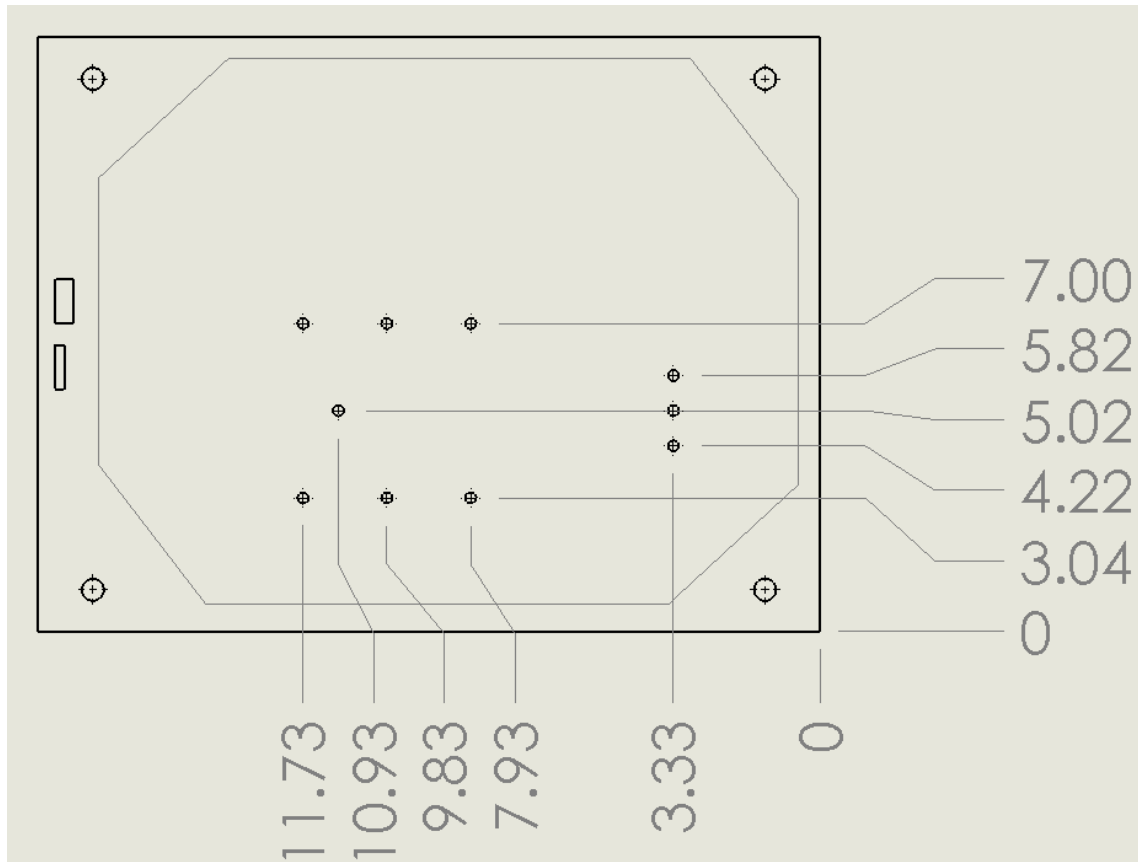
The current payload design would require the following hole pattern to be drilled into the HASP interface. Dimensions in inches.
